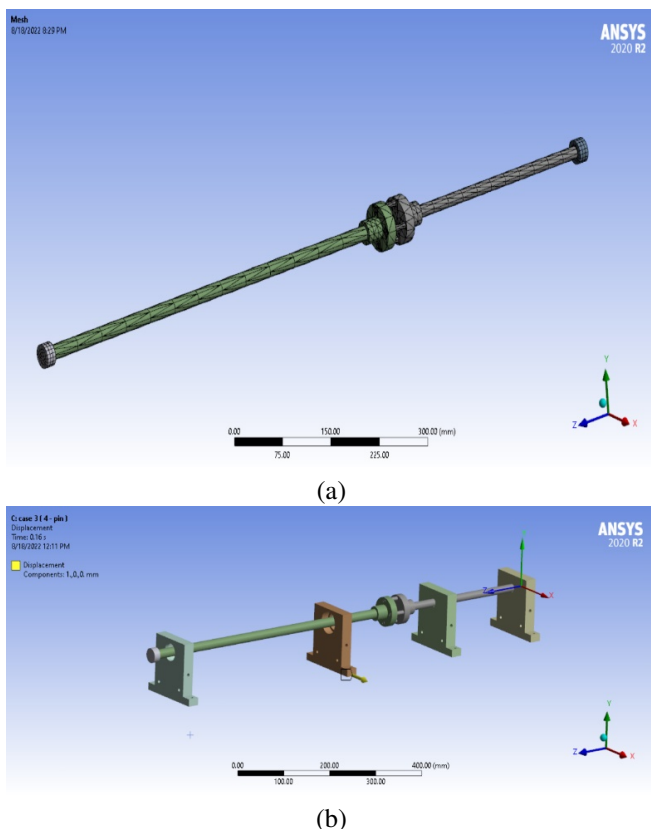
(a) meshed model of rotor bearing system, (b) The direction of displacement of the support base of the rotating shaft.
